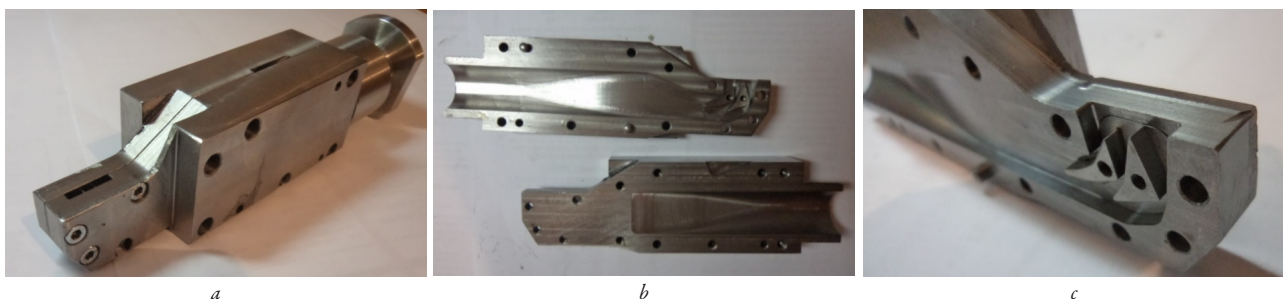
Manufactured 3-channel rotary nozzle: a – general view; b – internal geometry; c – rotary inserts
